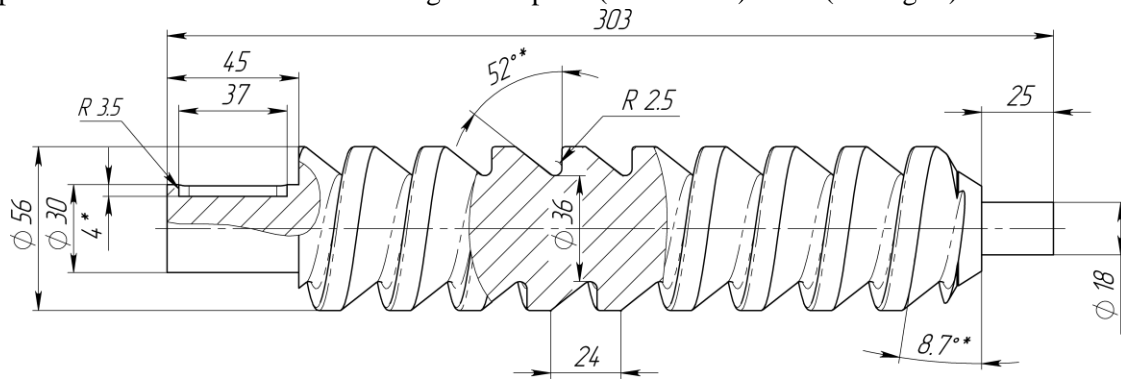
General design of the screw-type extruder for the vegetable oil production:
